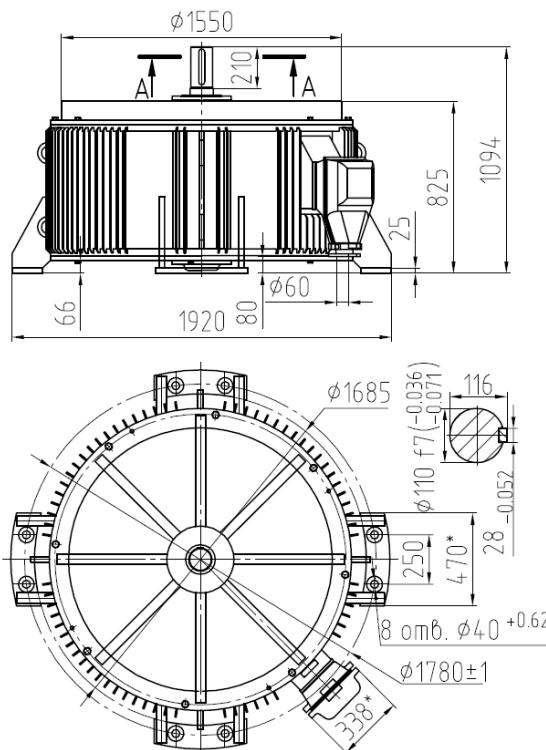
Overall and mounting dimensions of the electric motors ACBO15-23-34MY1
